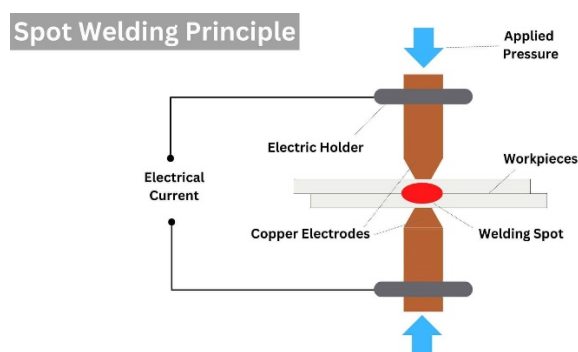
Spot Welding Principle. (IntRes. 3).
